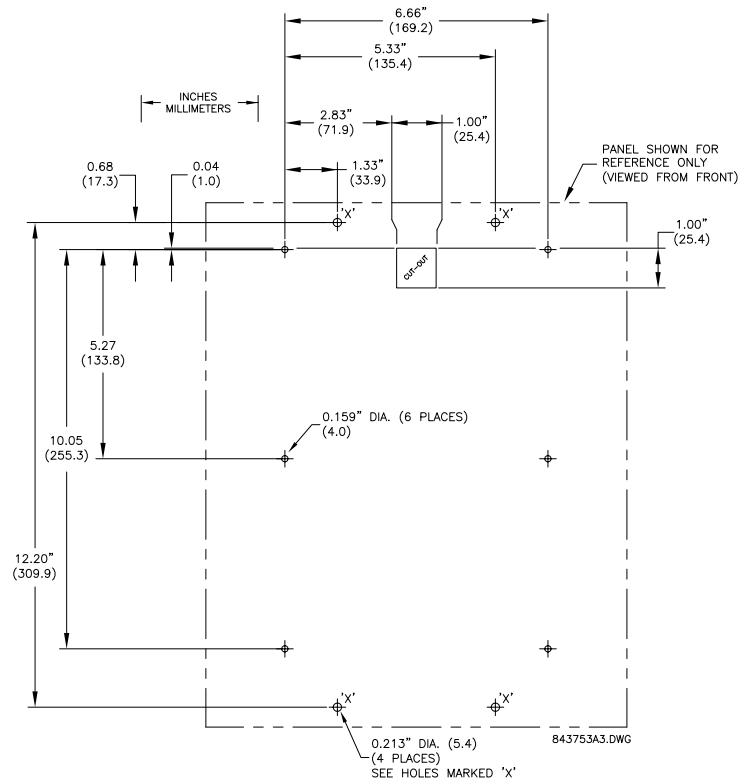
T35 VERTICAL SIDE MOUNTING REAR DIMENSIONS (STANDARD PANEL)
